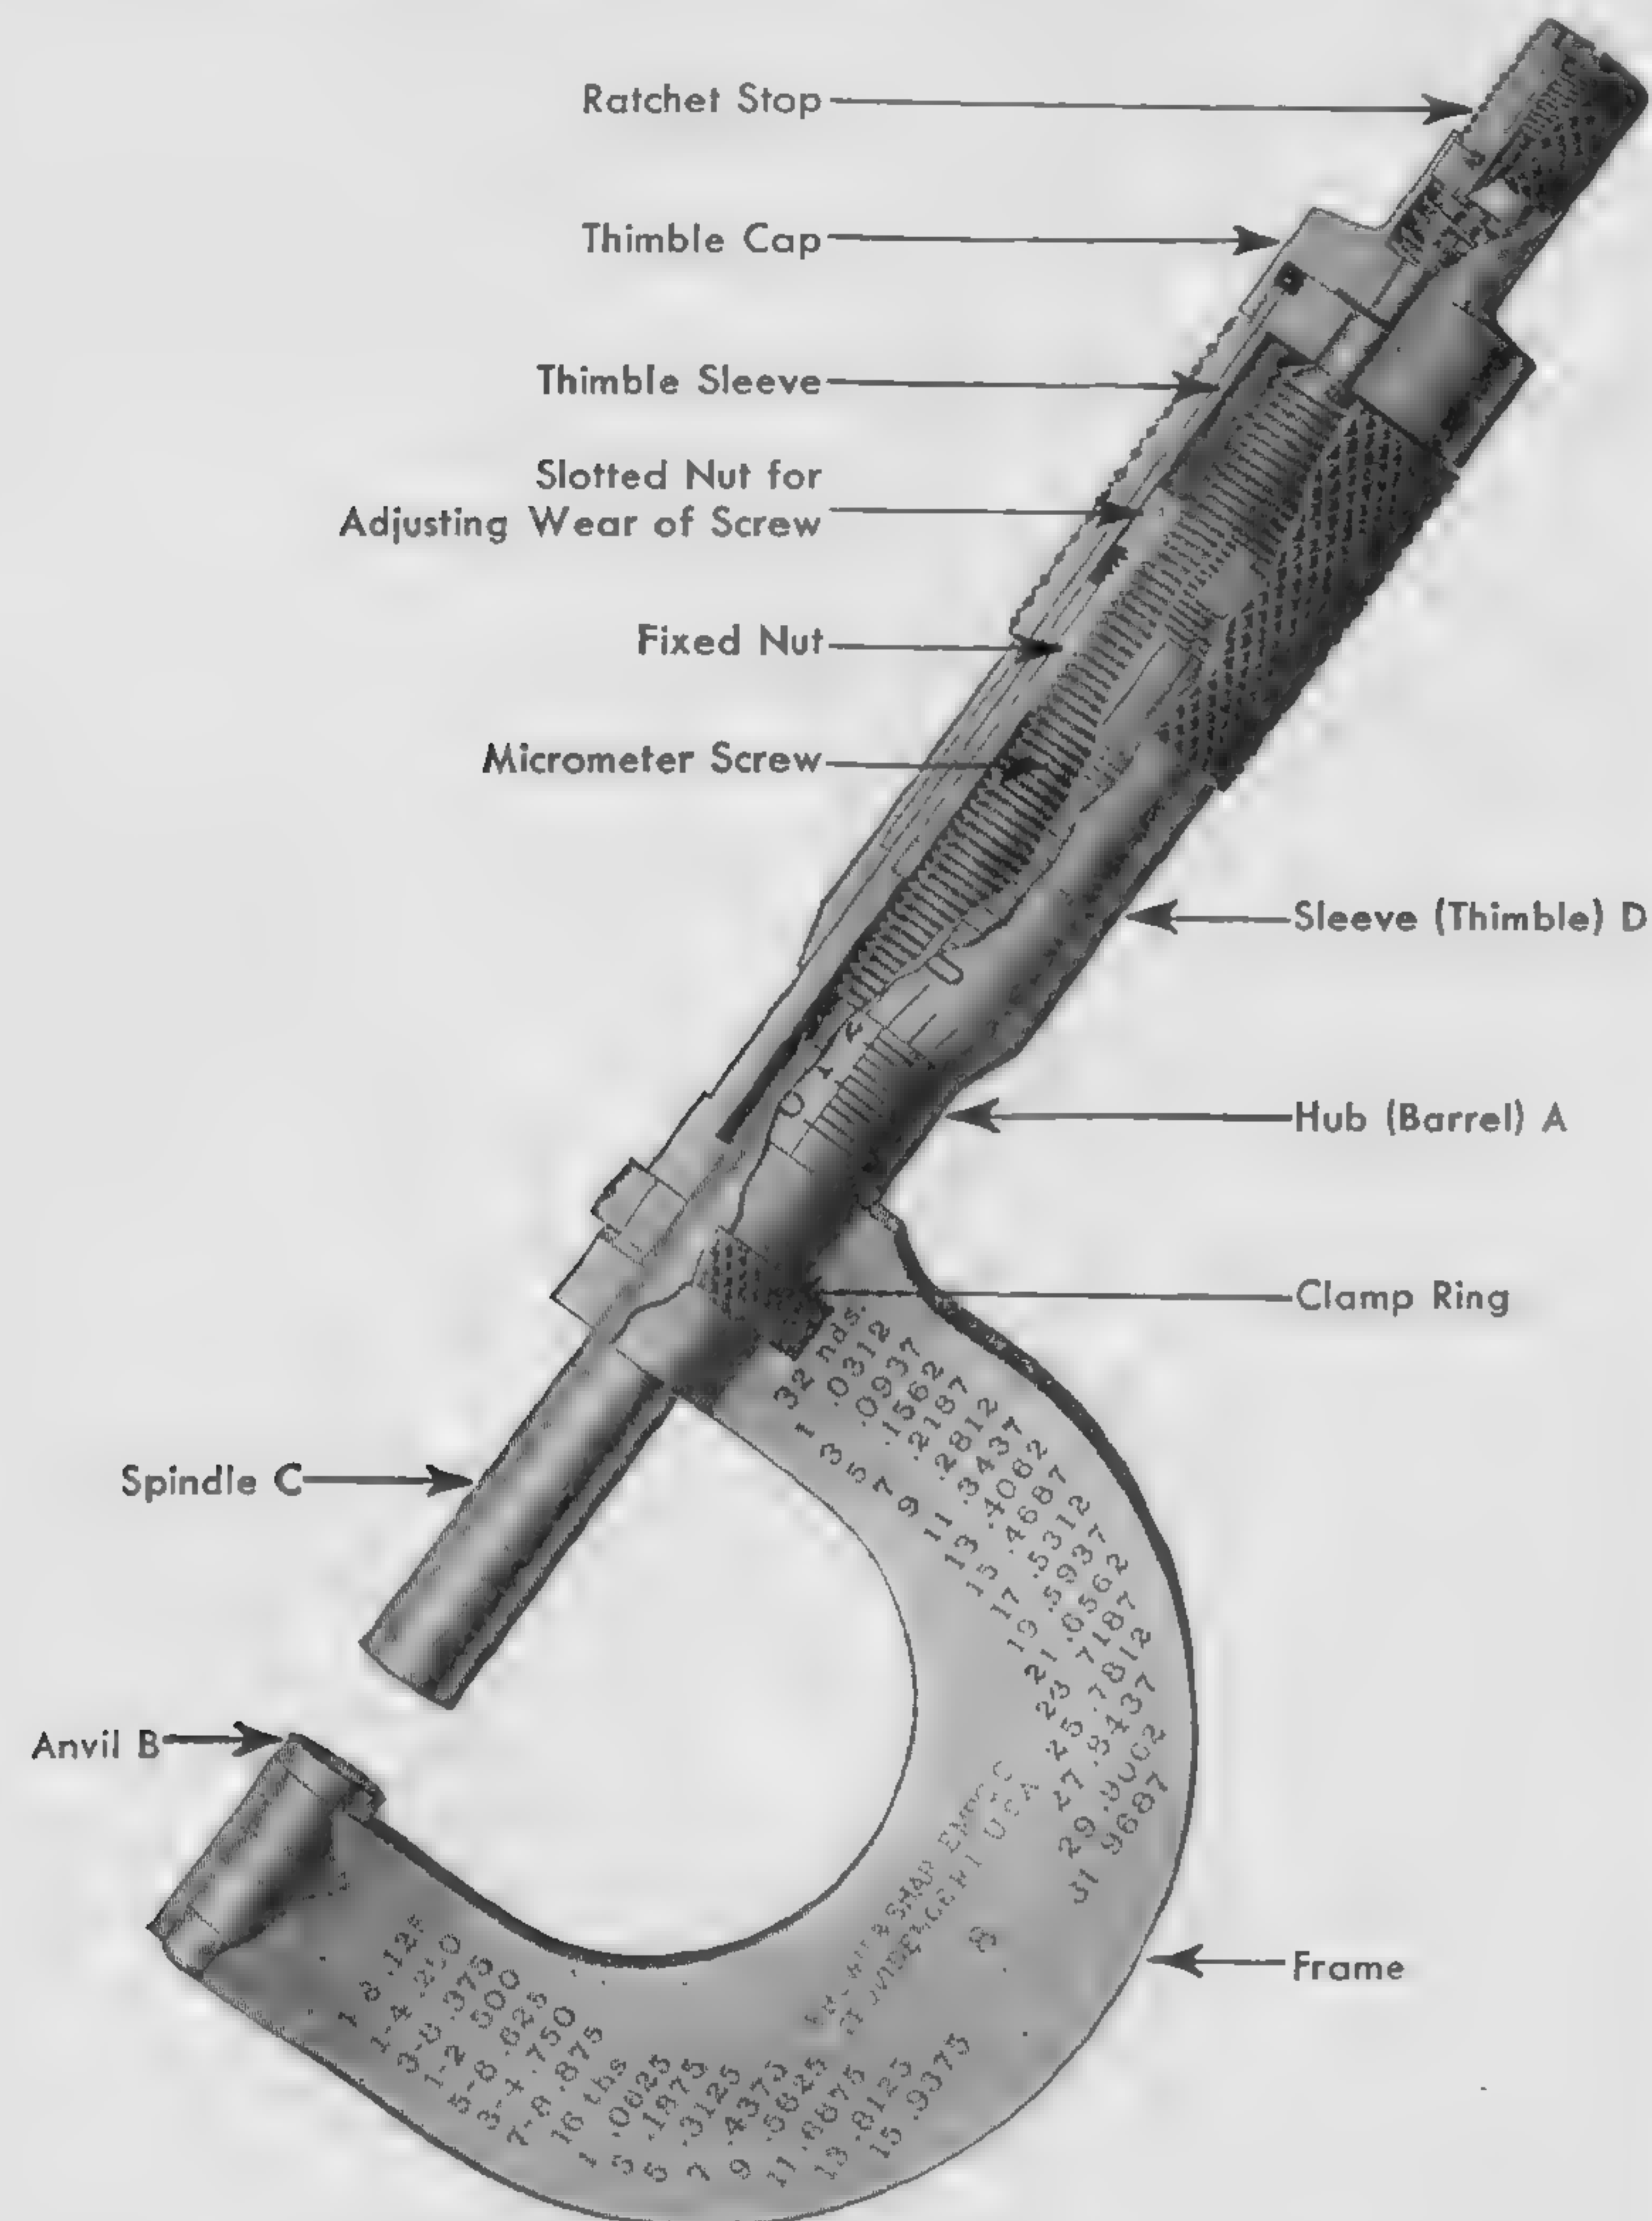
Cutaway View Showing Construction of Micrometer Caliper
